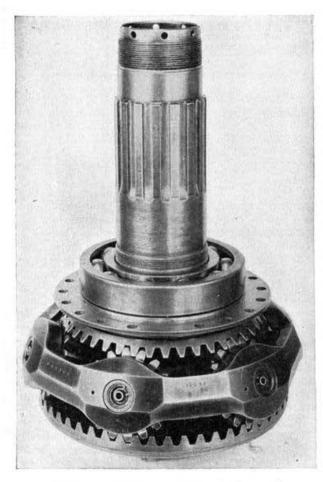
Bevel planetary-system reduction gearing. threaded on one end for a propeller hub nut. The thrust bearing, which absorbs propeller thrust, is
